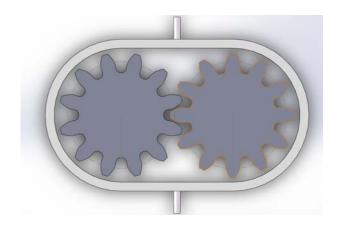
THREE-DIMENSIONAL MODEL OF THE GEAR PUMP
